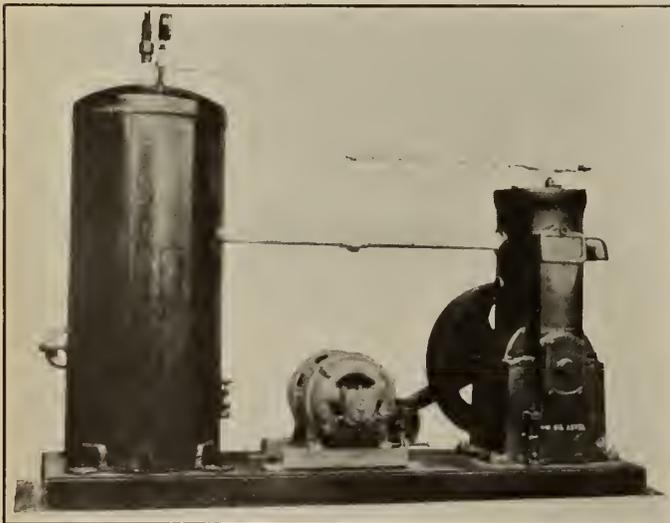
Motor with Welded Steel Frame Driving Compressor Mounted on Welded Steel Base, with Welded Steel Receiver; Illustrating Trend in Machine Design towards this type of Construction.
